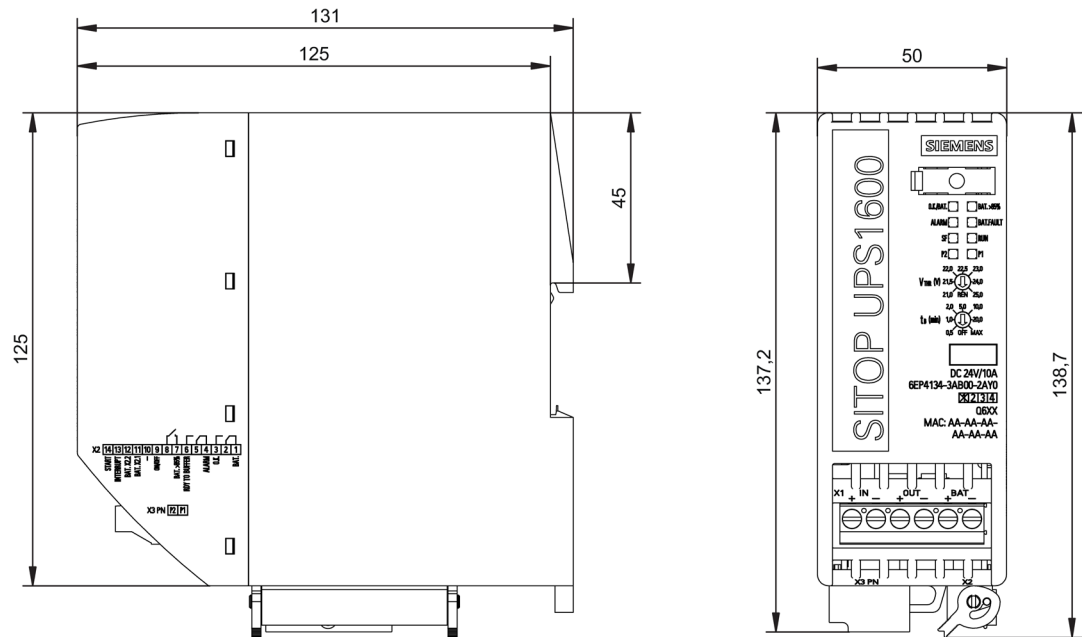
6EP4134-3AB00-2AY0, 6EP4136-3AB00-2AY0 dimensioned drawing
